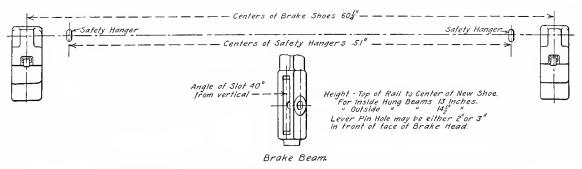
M. C. B. Standard Brake Beam. (M. C. B. Sheet I7A.)
